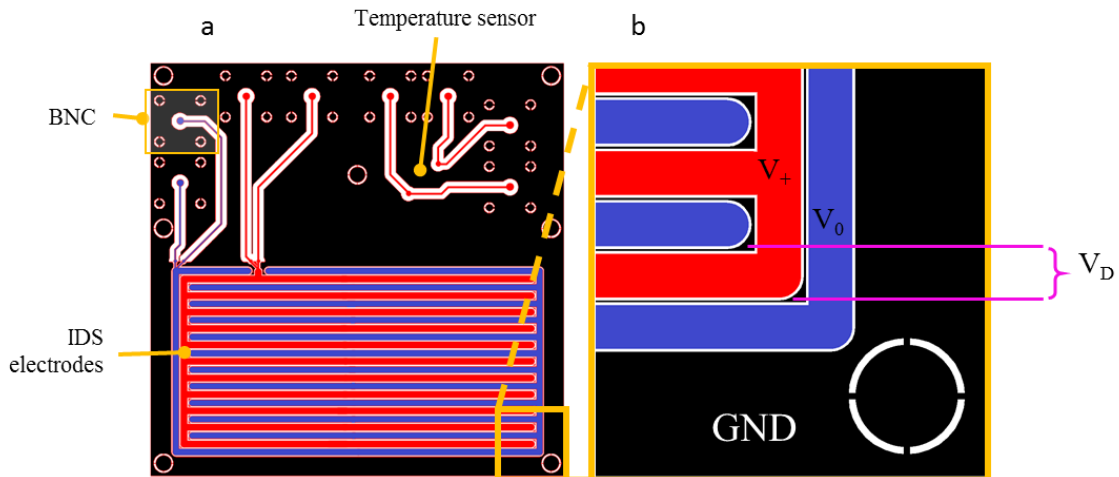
The PCB drawing of the manufactured IDS3.0. (a) The top view of the 100 by 100 sensor board with designed placement of a PT100 temperature probe and (b) a close view of the fine structure resolving the placement of the deflector electrode w_D .
